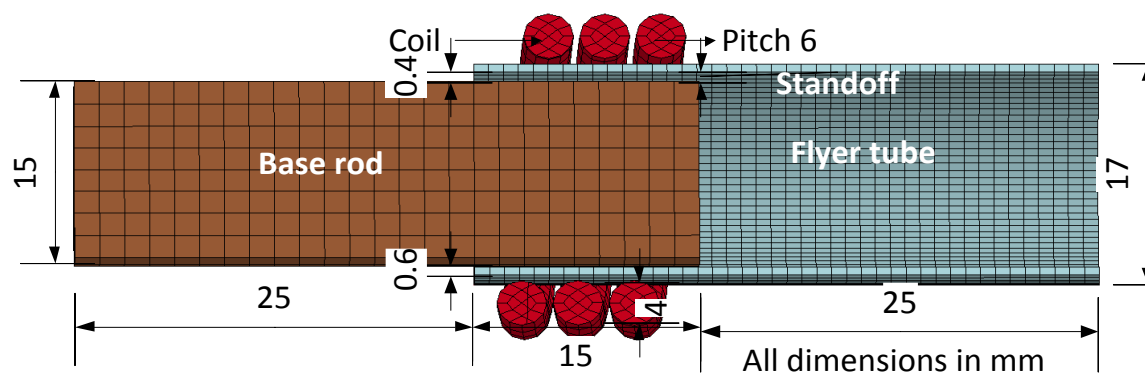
Dimensions of the copper coil, Al tube and DP steel rod sample
